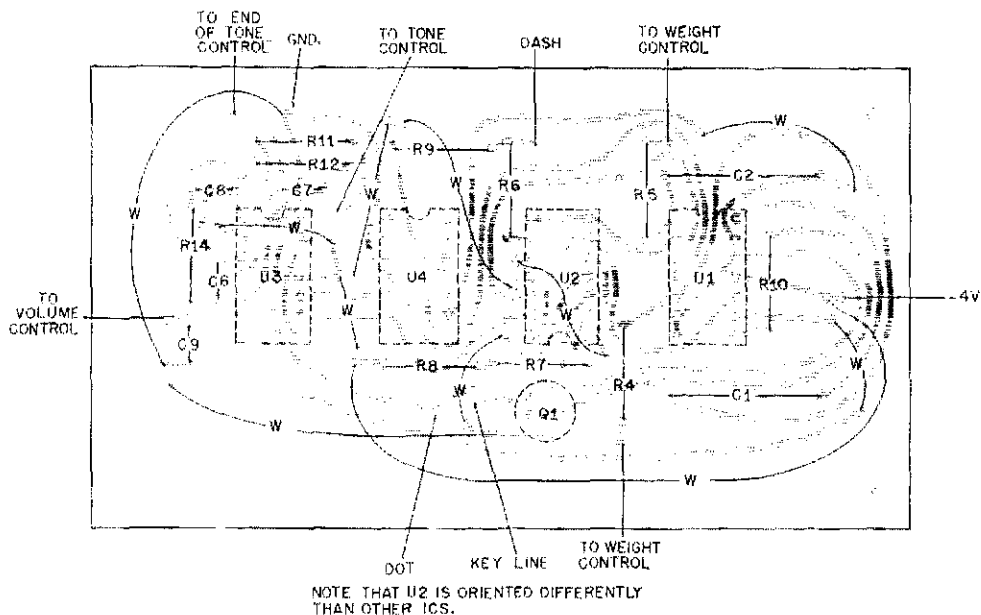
Etching-pattern template and component layout for the keyer with weight control, shown from the foil side of the board. W indicates wire jumpers added on foil side of board. Pattern is full scale. Keyer components not mounted on the circuit board are located on the chassis enclosure.
